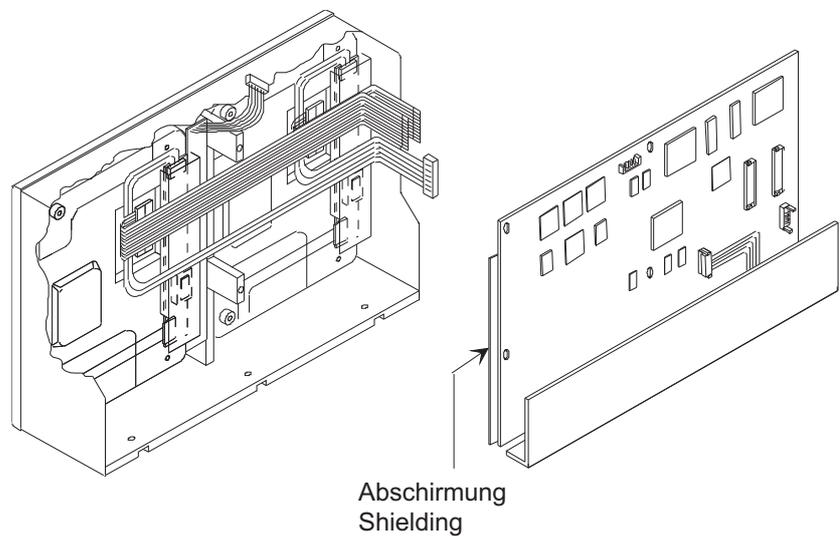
Removing the mounting unit with main pcb and connector panel
